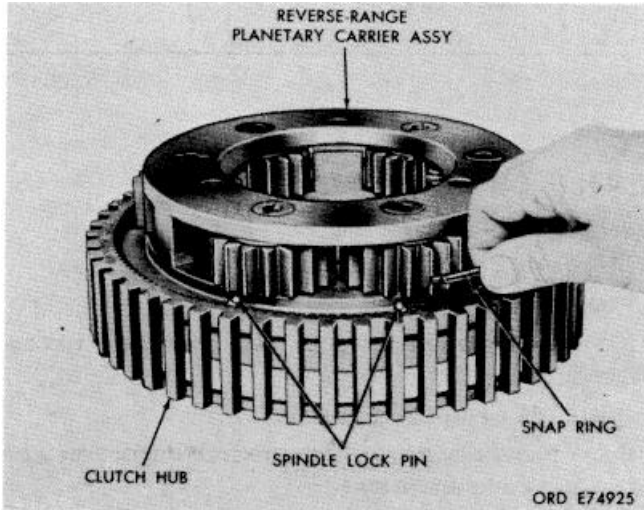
Removing (or installing) retaining snap ring which retains reverse-range clutch hub.
